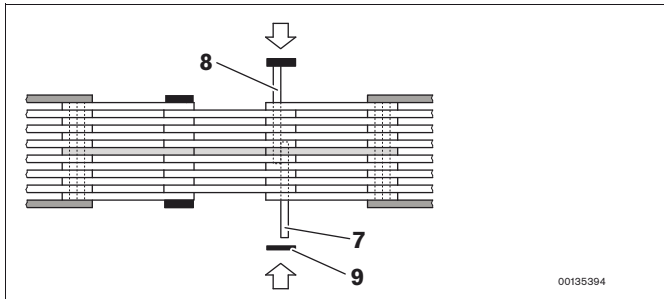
Insert the lock pivot and rolling pivot, place the rivet plate on
